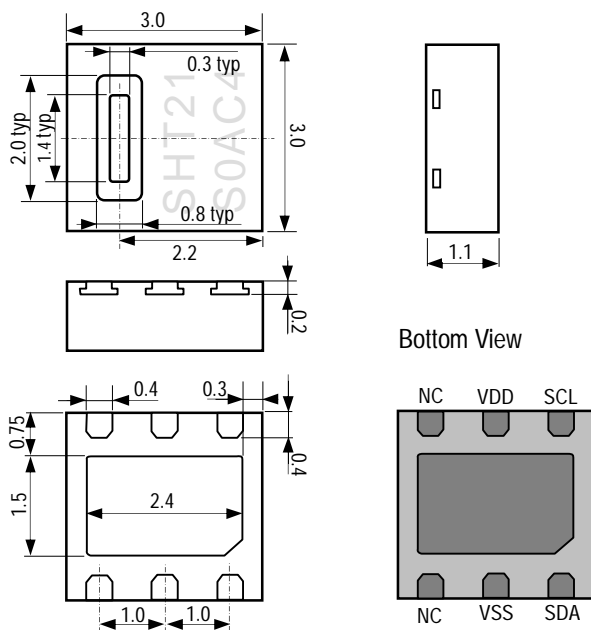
Drawing of SHT21S sensor package, dimensions are given in mm (1mm = 0.039inch), tolerances are ± 0.1 mm. NC and die pad (center pad) are internally connected to VSS. They may be left floating. VSS = GND, SDA = DATA.
